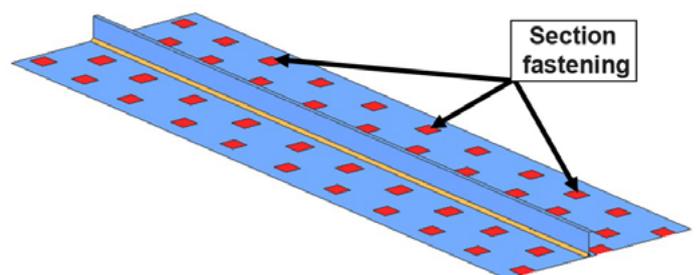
Variant “2” of the fastening – section “fastened” to the welding table in selected areas (areas marked red)
